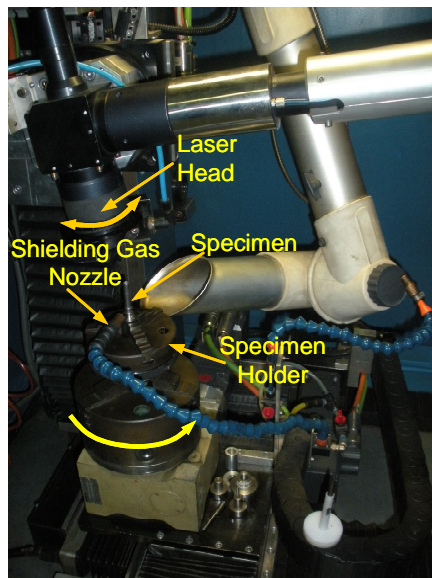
Photographic view of Nd:YAG laser-welding system
